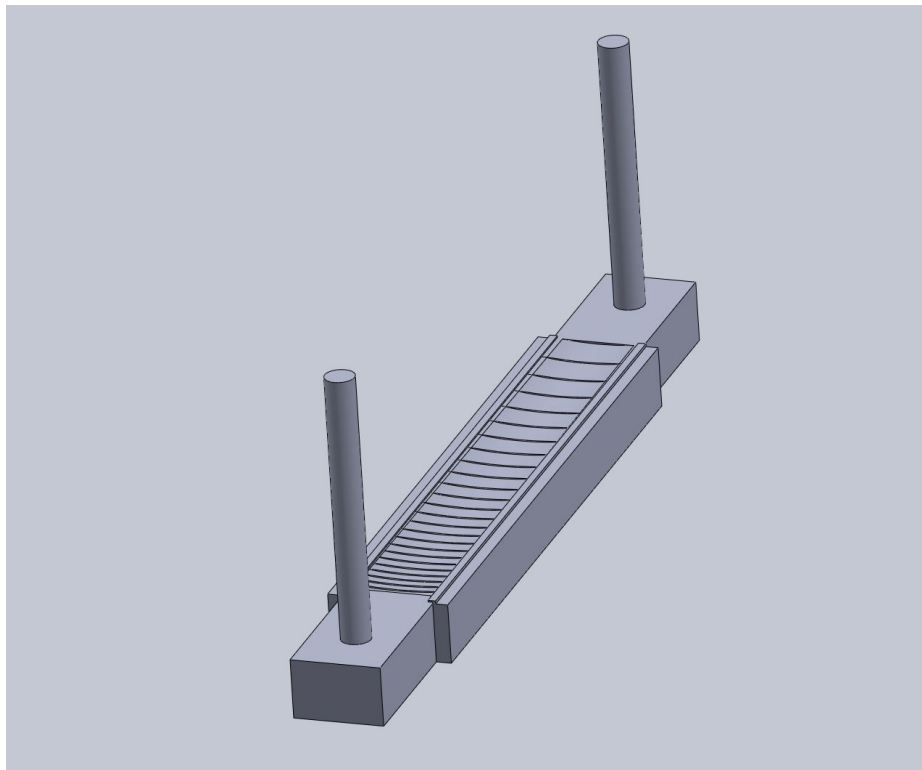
Bottom Half of the Fret to Fretboard Jig
